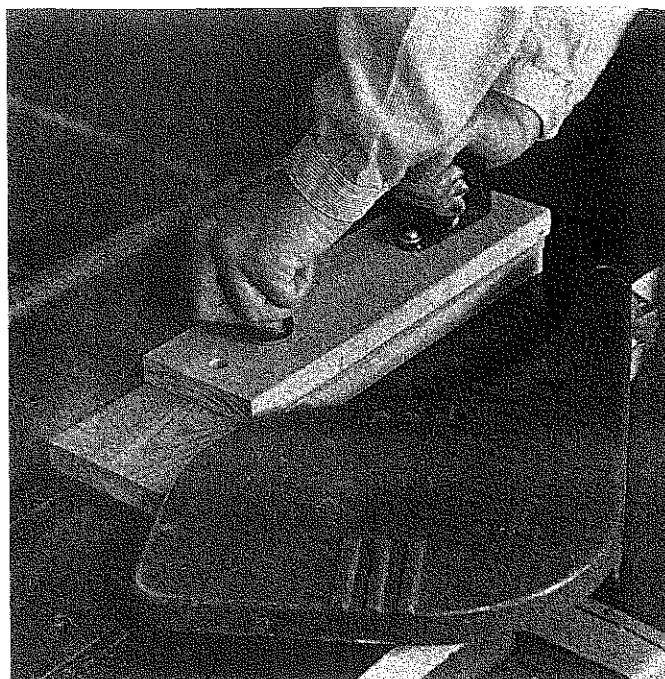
Smoothing the surface of stock using a push shoe.
